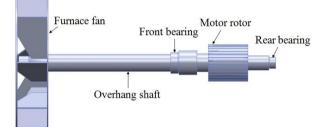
The Fan-shaft Calculation Model for Furnace Motor
